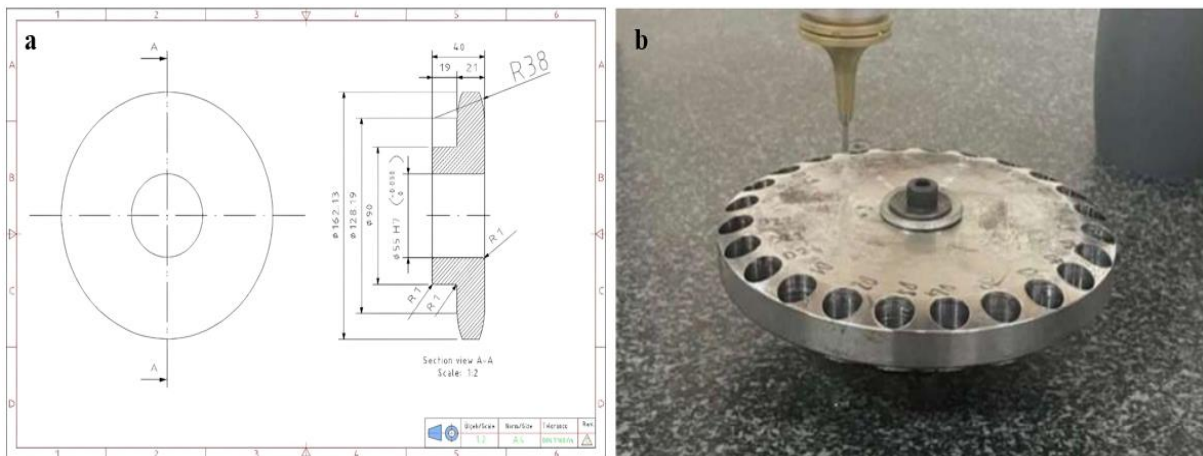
16B chain sprocket technical drawing (a) and Test specimen (b)
